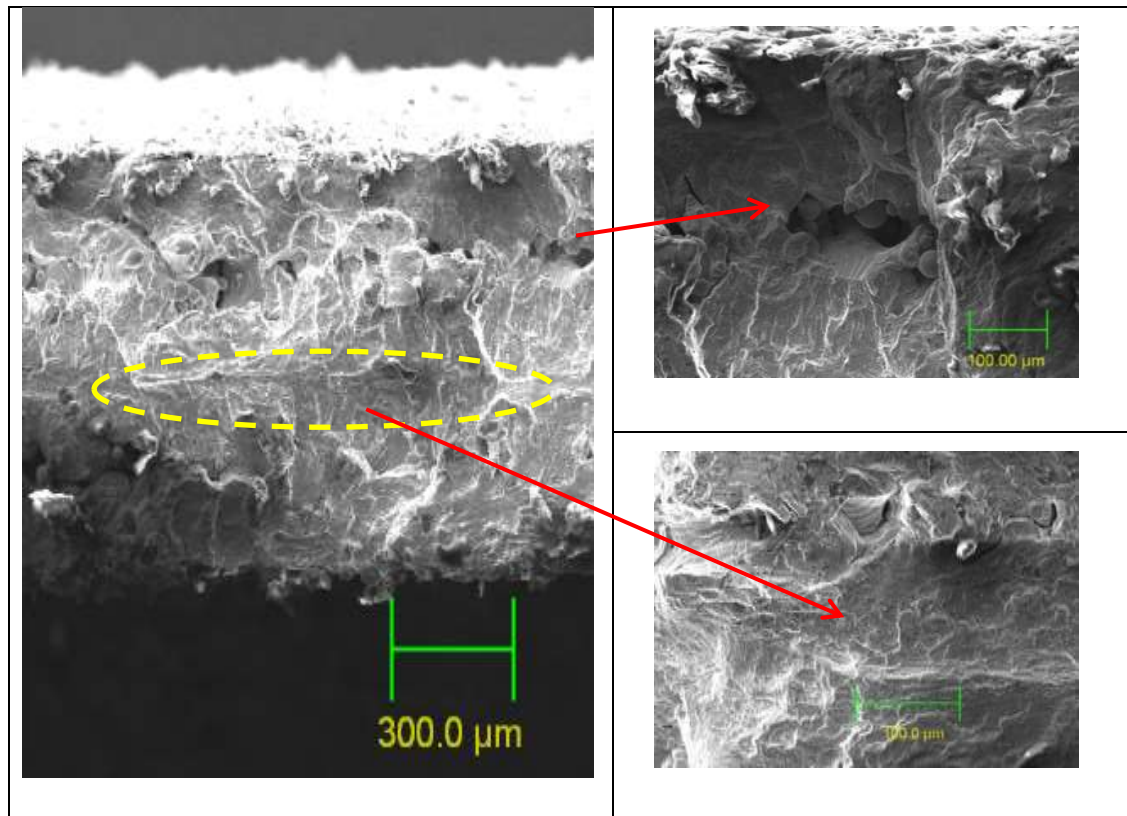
Micrograph of fatigue fracture surfaces at high stress (1350 MPa) for SLM parts as fabricated ($R_a = 10\mu\text{m}$) demonstrating different regions of the fatigue fracture surfaces.
